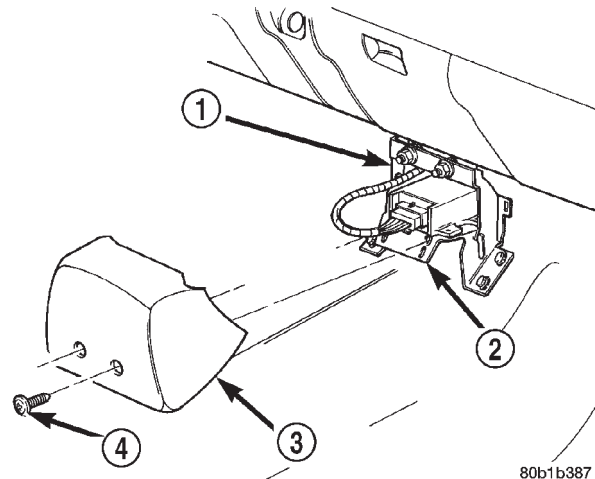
Airbag Control Module Trim Cover Remove/Install
